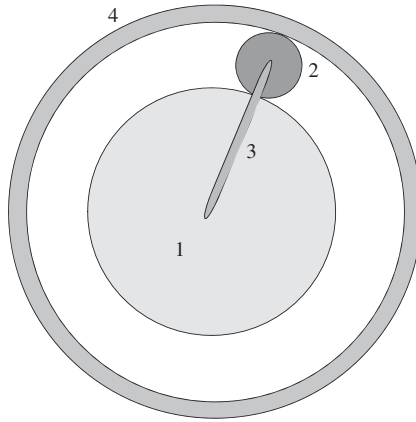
A planetary gear train: 1, the sun gear; 2, the planetary gear; 3, the arm or planet carrier; and 4, the ring gear
